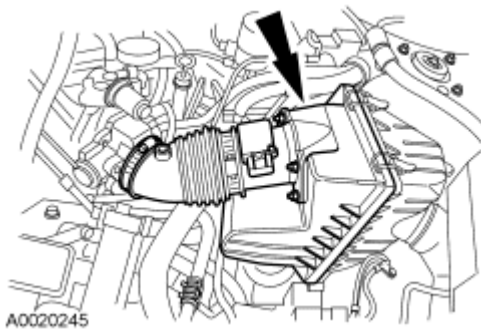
Locating Intake Tube & Air Cleaner Cover
